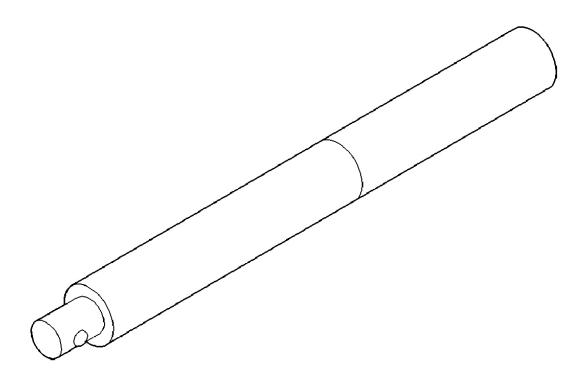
Universal Driver Handle - C4171 Courtesy of CHRYSLER LLC
